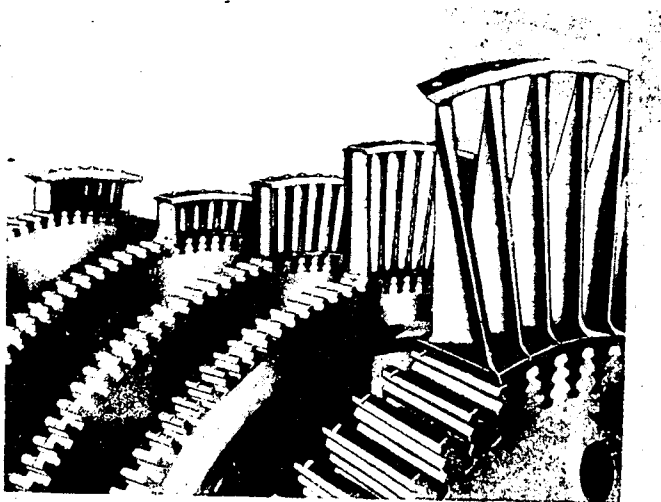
Shows shape of twisted blades; side entry blades dovetail into rotor discs to transmit force to turbine shaft. Shrouds tie groups of blades together and help prevent steam leakage.
